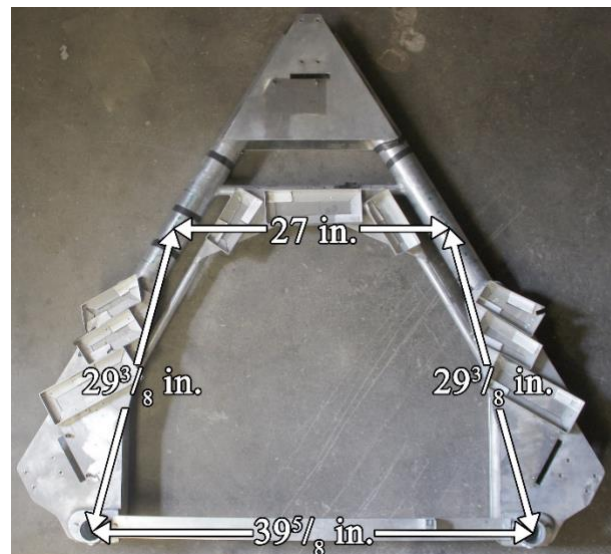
C2C load bearing points depicted using the previous design team's platform.
